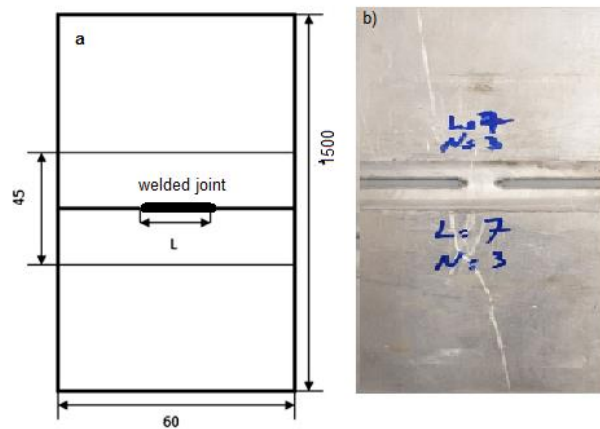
(a) Geometry and dimensions of the welded DENT specimen (dimensions are in mm).
